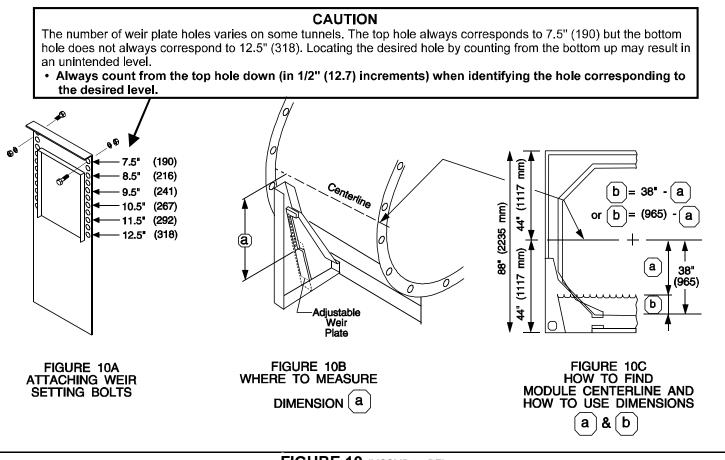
(MSSMD405BE) Setting and Checking Weirs
